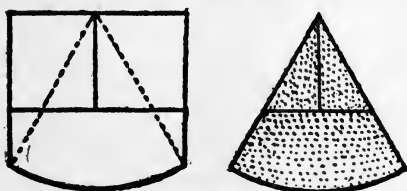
Method of Forming Each of the Three-Piece Strips.
